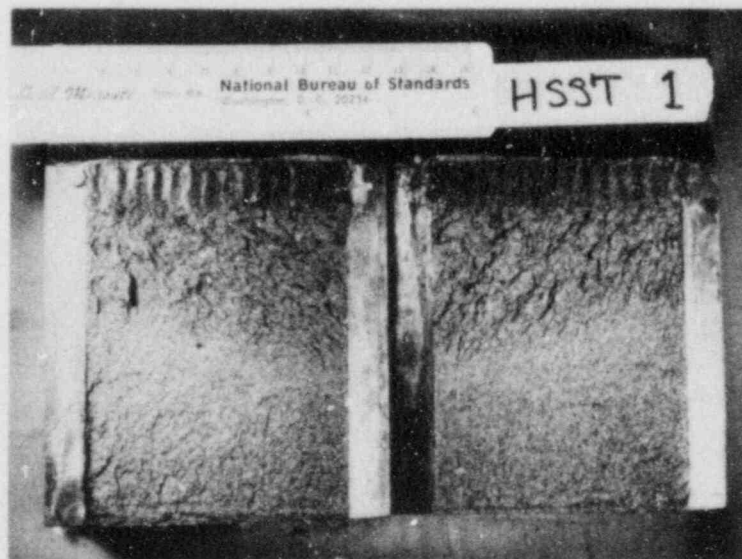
Fracture surface of bend test specimen No. 1.
